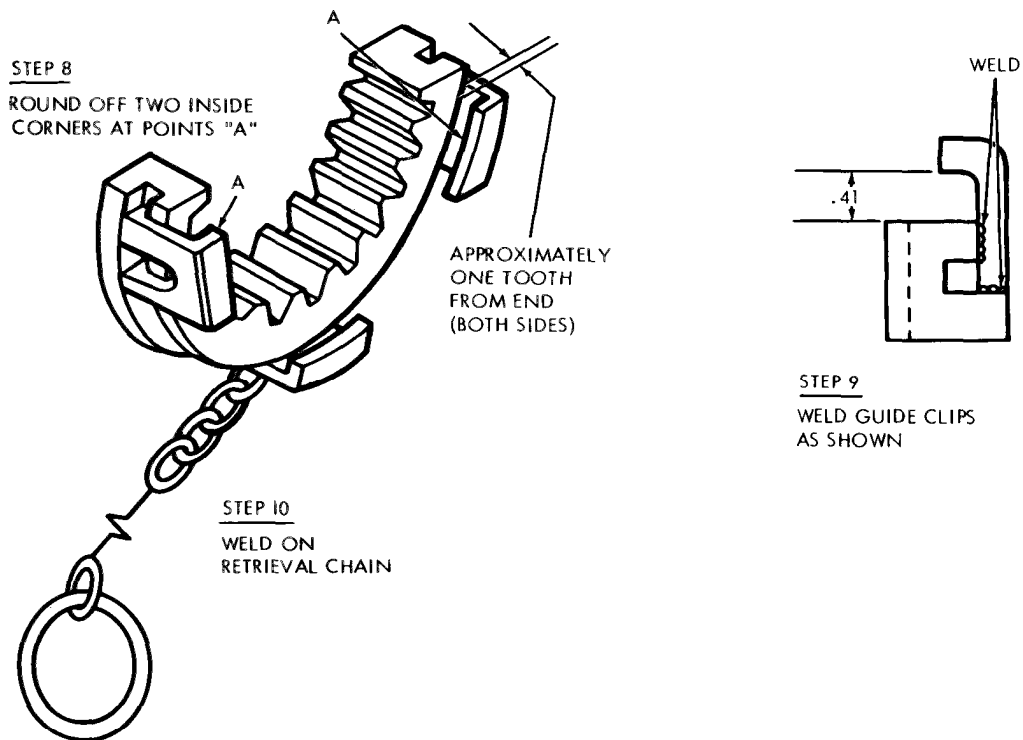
Final drive adapter hook-up tool (Sheet 2 of 2).
